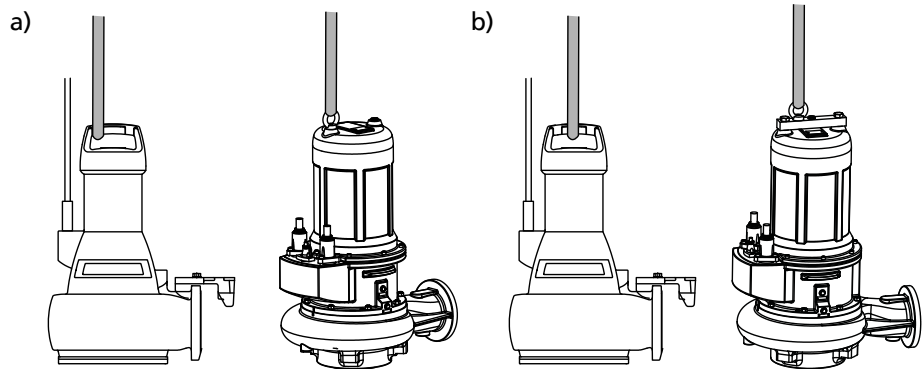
Attaching the chain / lifting rope for stationary wet installation a) with guide cable arrangement b) with guide rail arrangement
